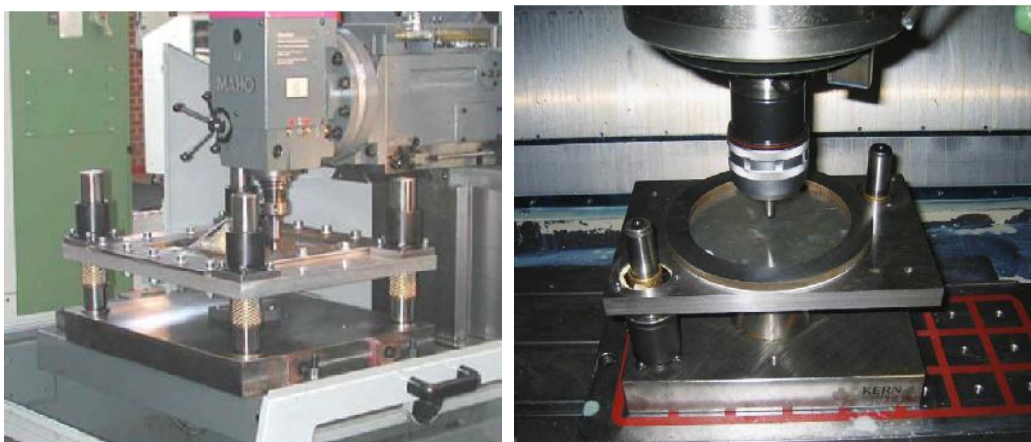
SPIF adapted milling machines. (Left, Jeswiet et al. [2]), (right, Kopac et al. [31]).
